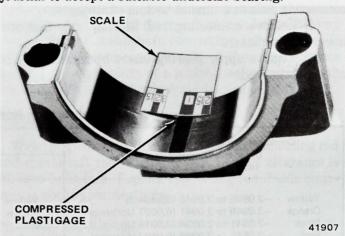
B-105 Bearing Clearance Measurement with Plastigage
